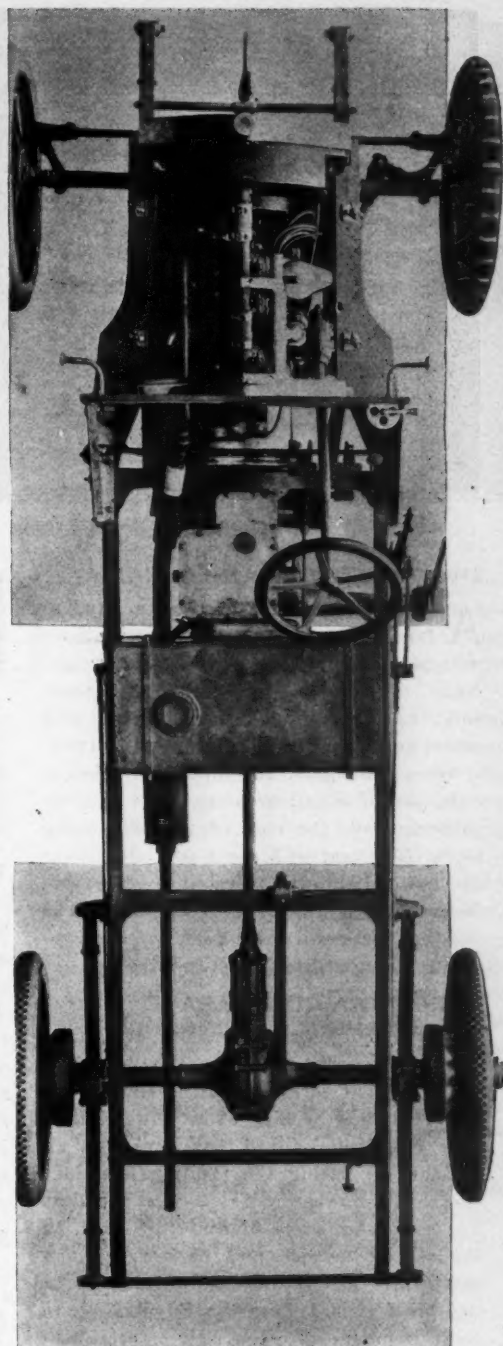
PLAN VIEW, FOUR-CYLINDER CHASSIS
